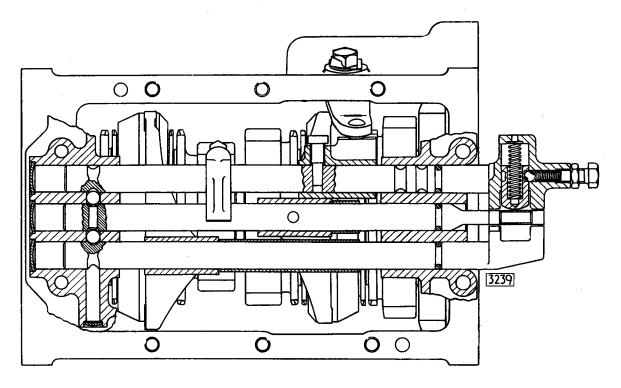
Plan view of gearbox with top cover removed to show selector arrangement.
